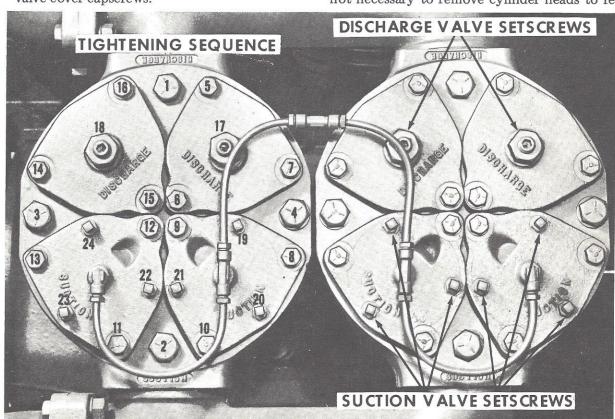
Cylinder Head Tightening Sequence and Location of Setscrews
